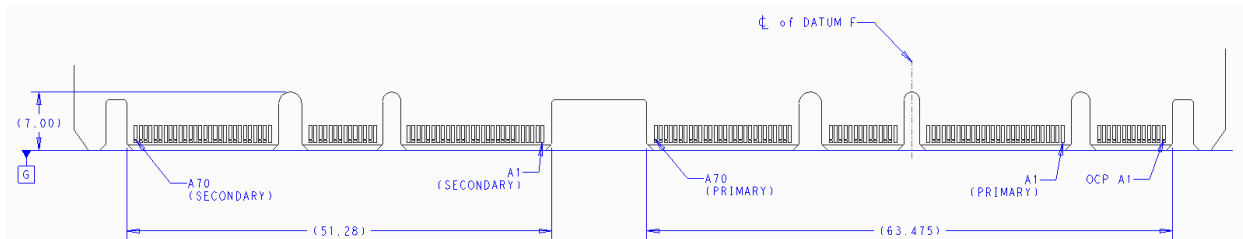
LFF Gold Finger Dimensions – x32 – Bottom Side (“A” Pins)
